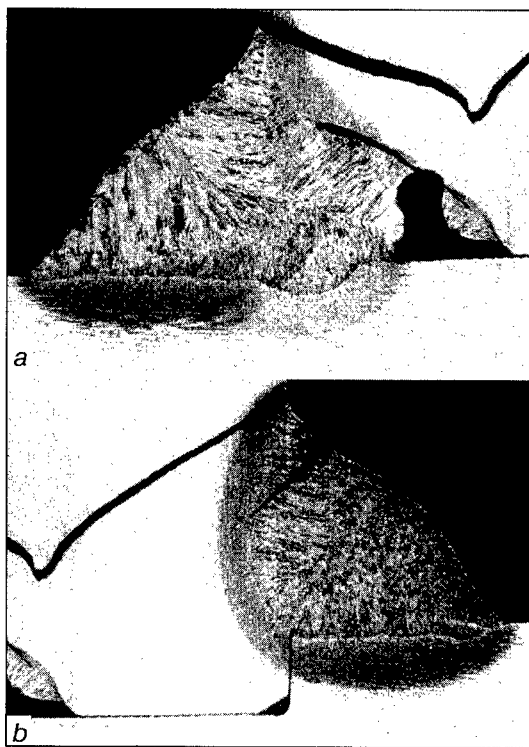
Transverse section of the joint containing cracks between the shaft (a) and the base (b)
